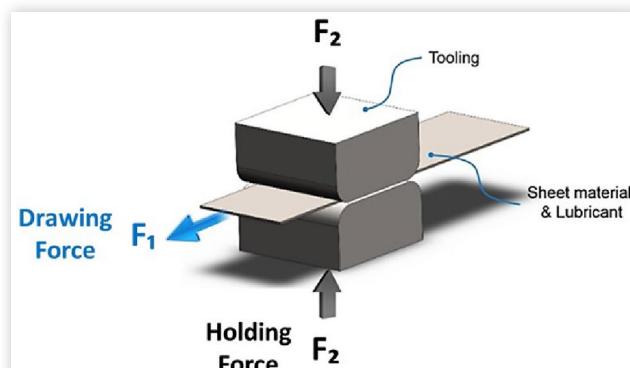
The laboratory testing setup: the sheet metal strip is pulled in between the flat inserts clamped by horizontal hydraulic press.
